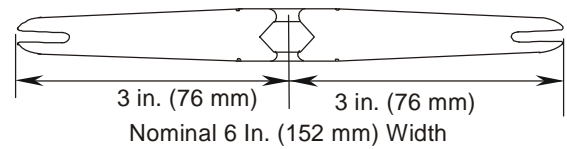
Mounting Dimensions Vertical Blades with Thrust Washers
